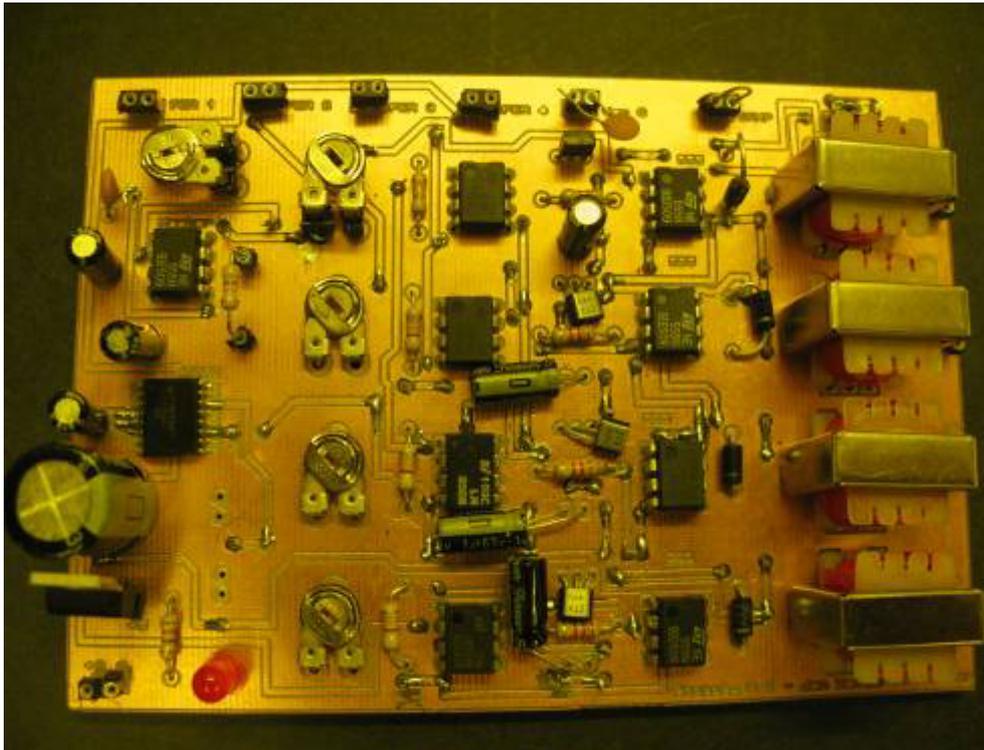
PCB of the analogue device built at Bournemouth University
